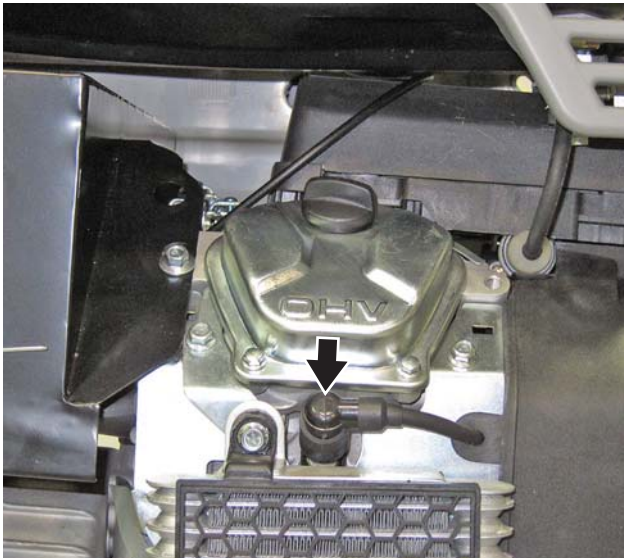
Removal of Spark Plug Boot – 10KPRO
